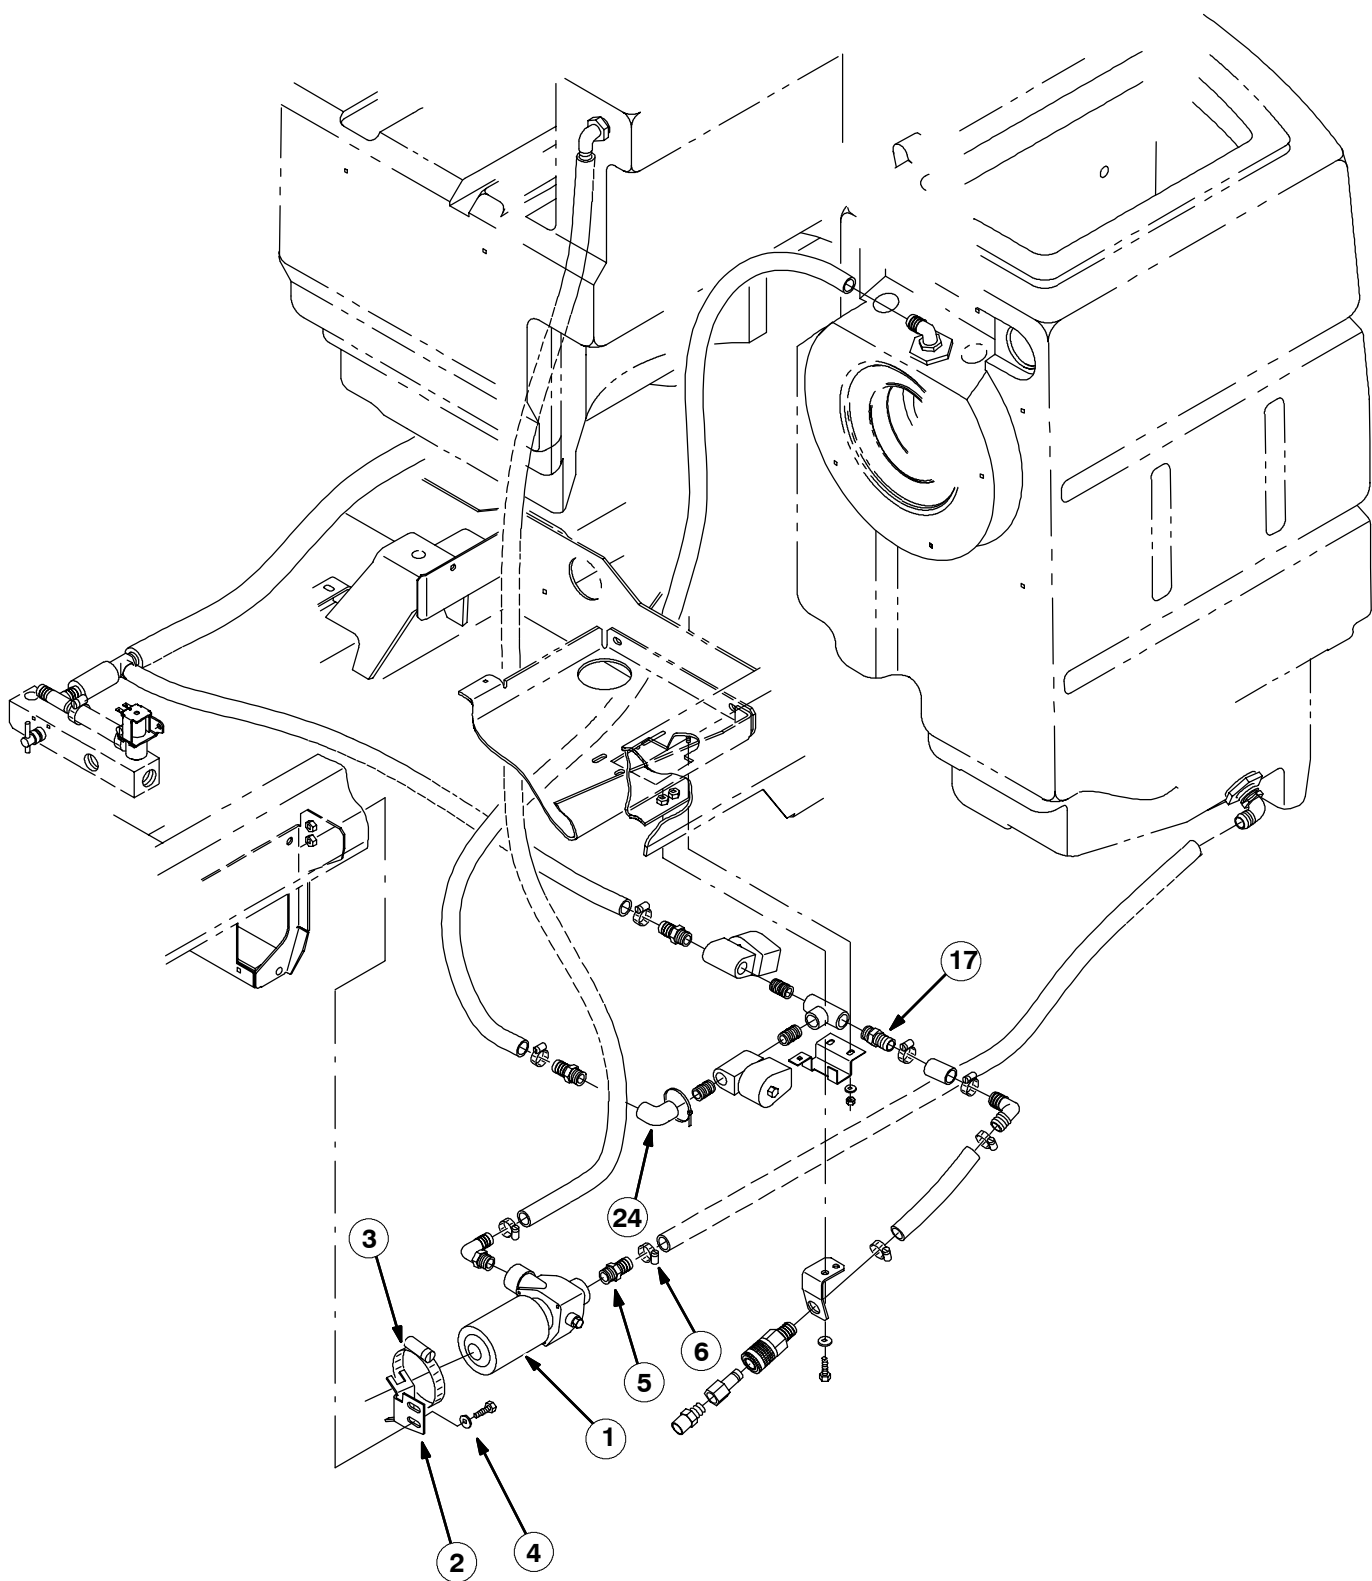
NEW ES™ PUMP AND AUTOFILL GROUP (xxxxxx-)
